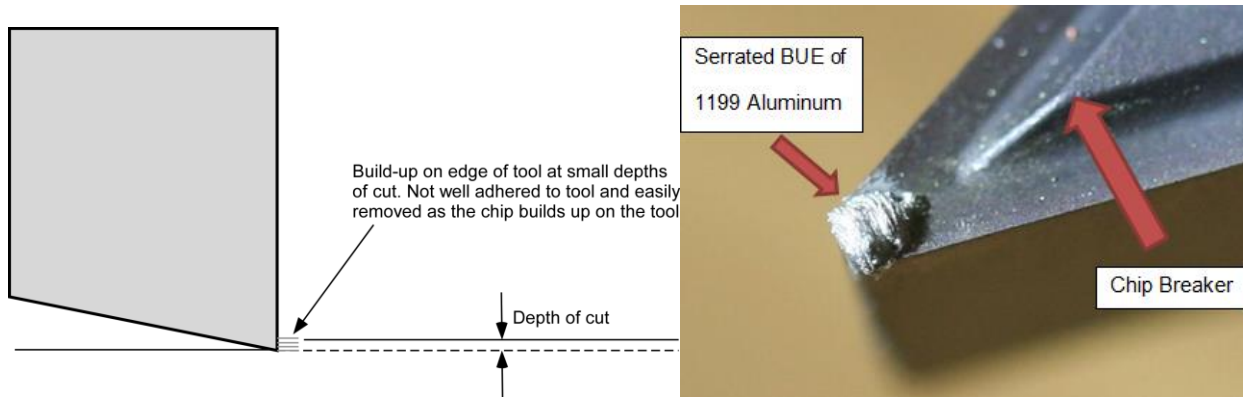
Geometry of the Pickup of Workpiece Material on the Carbide Tool at Small Depths of Cut
